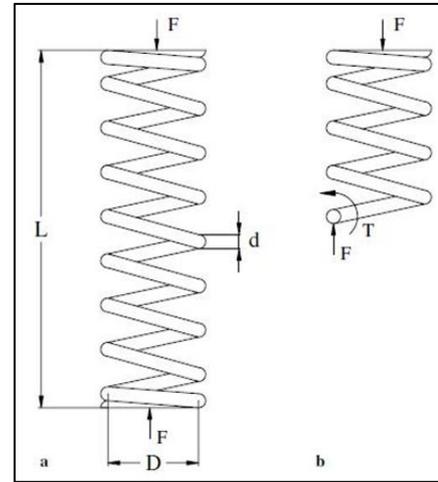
Helical spring with Axial Load & (B) Free Body Diagram
